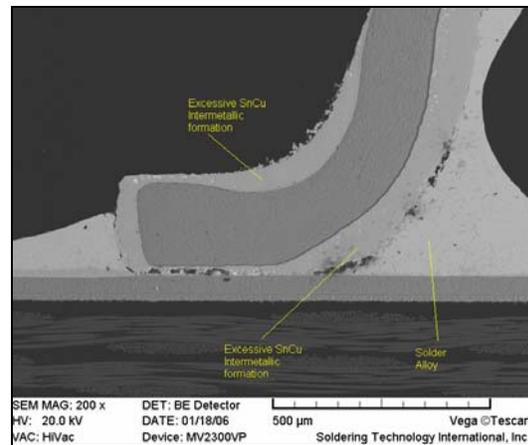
Excessive intermetallic growth and subsequent fracturing at the SnCu intermetallic solder alloy interface
